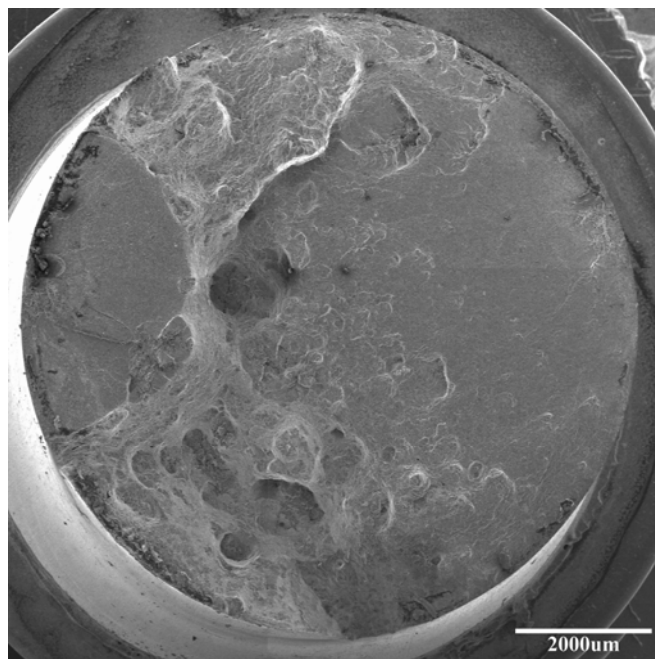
Macroscopic View of a Cylinder with Disc Specimen Fracture Surface, $S_a=392$ MPa (Specimen H5)
